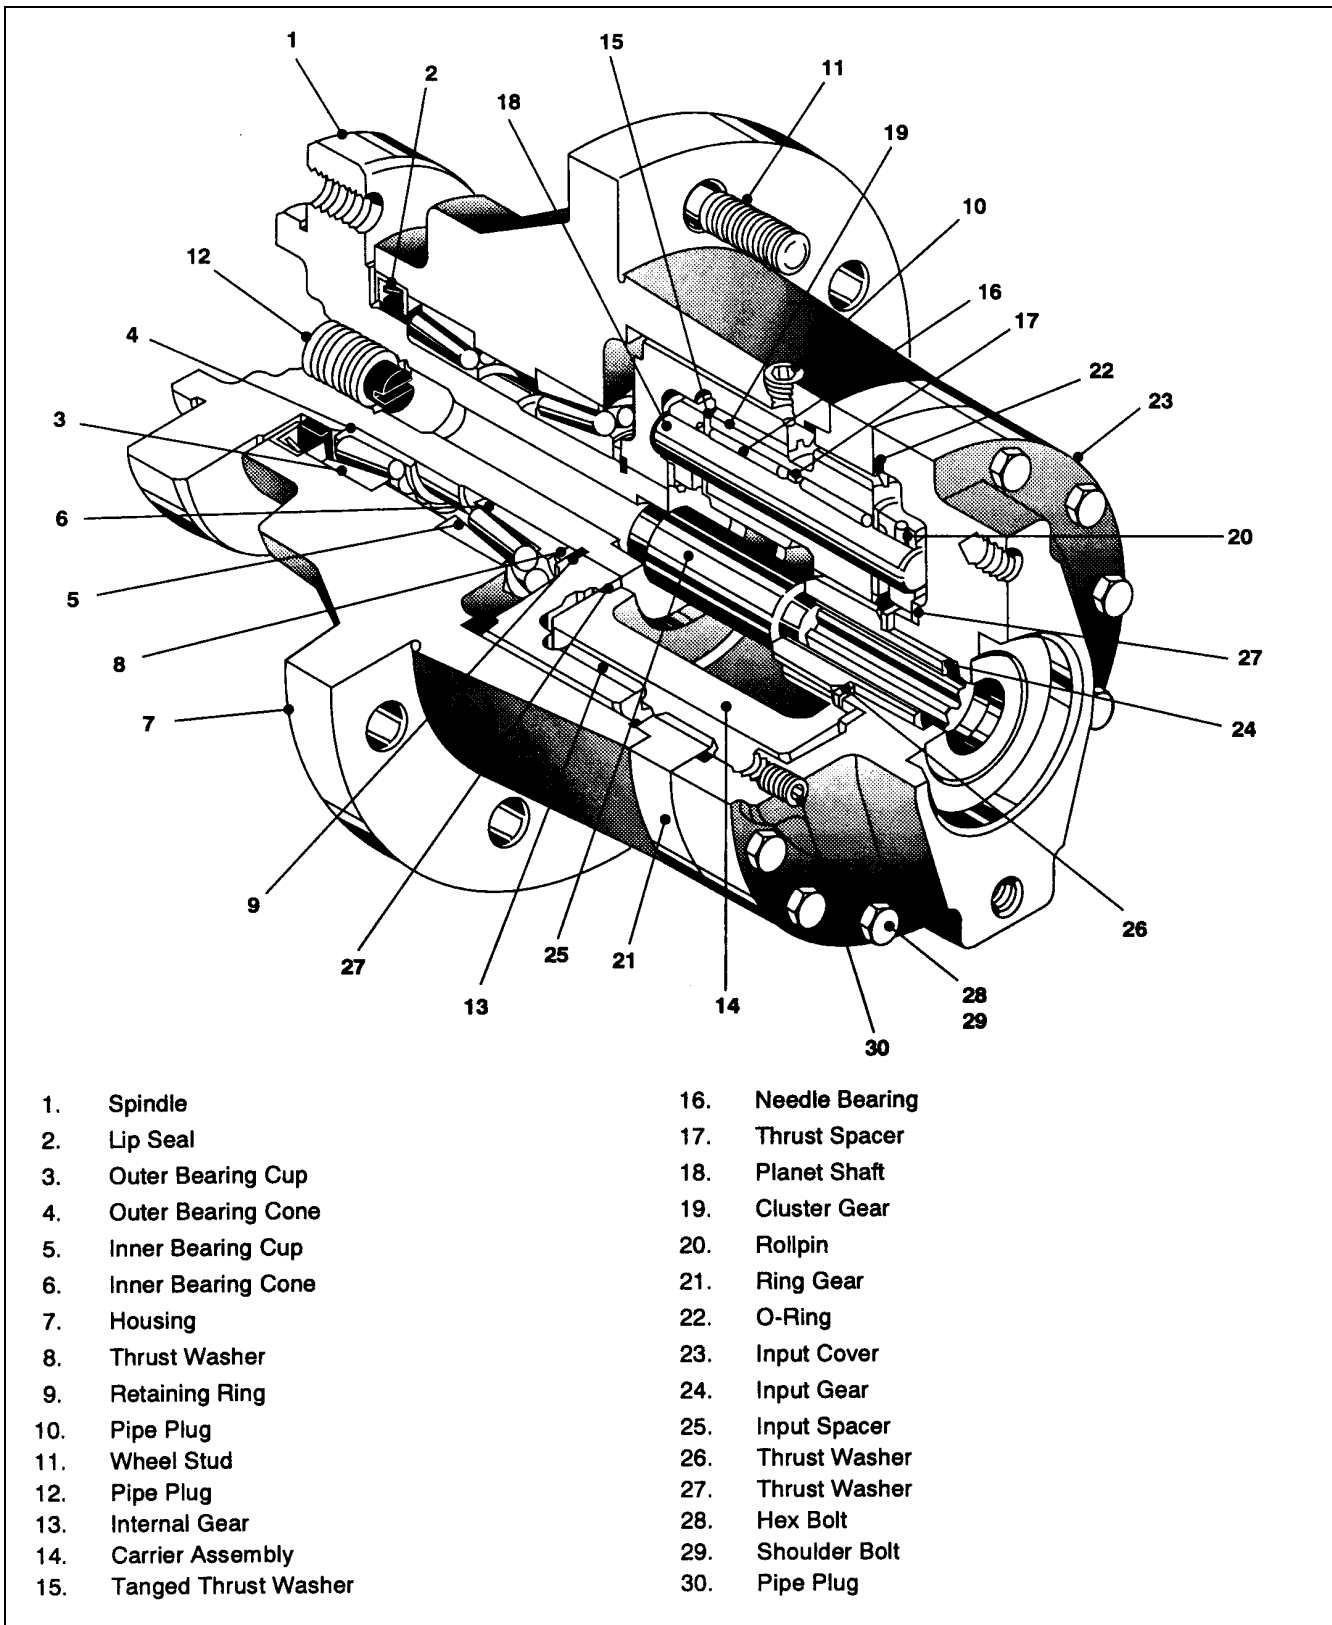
Drive Hub Assembly - 30/35/n35/40/n40/45.
